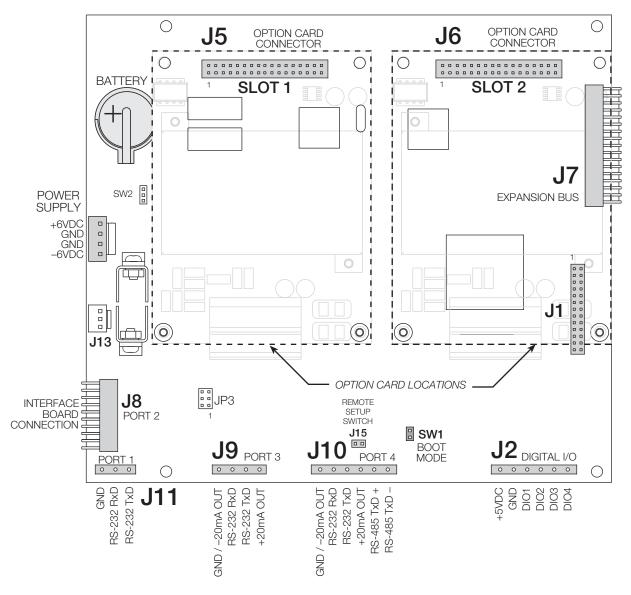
BCi CPU Board, Showing Option Card Locations
